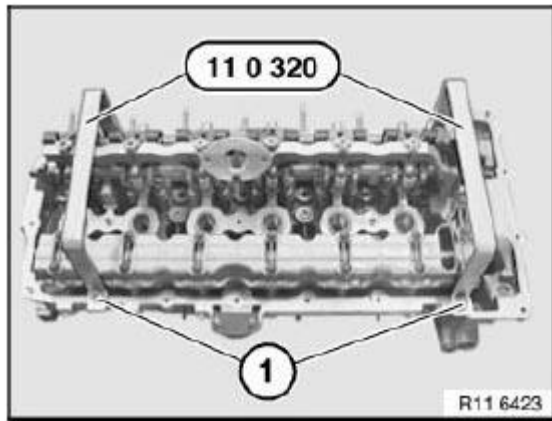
Installing Cylinder Head Cover Using Special Tool 11 0 320
